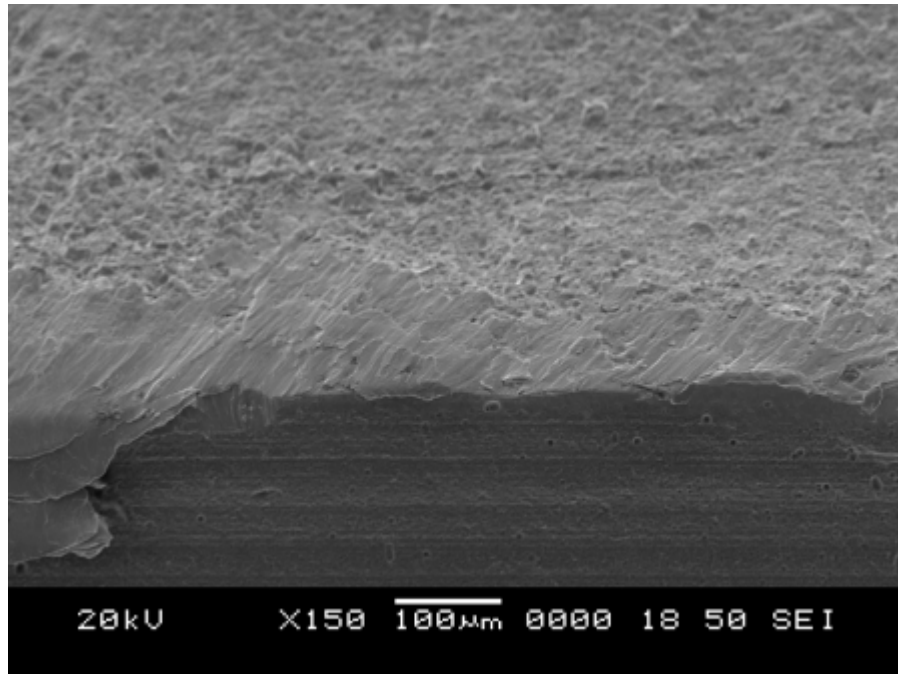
Drive side, tooth 2, gear half, origin location. (Note the damage.)
